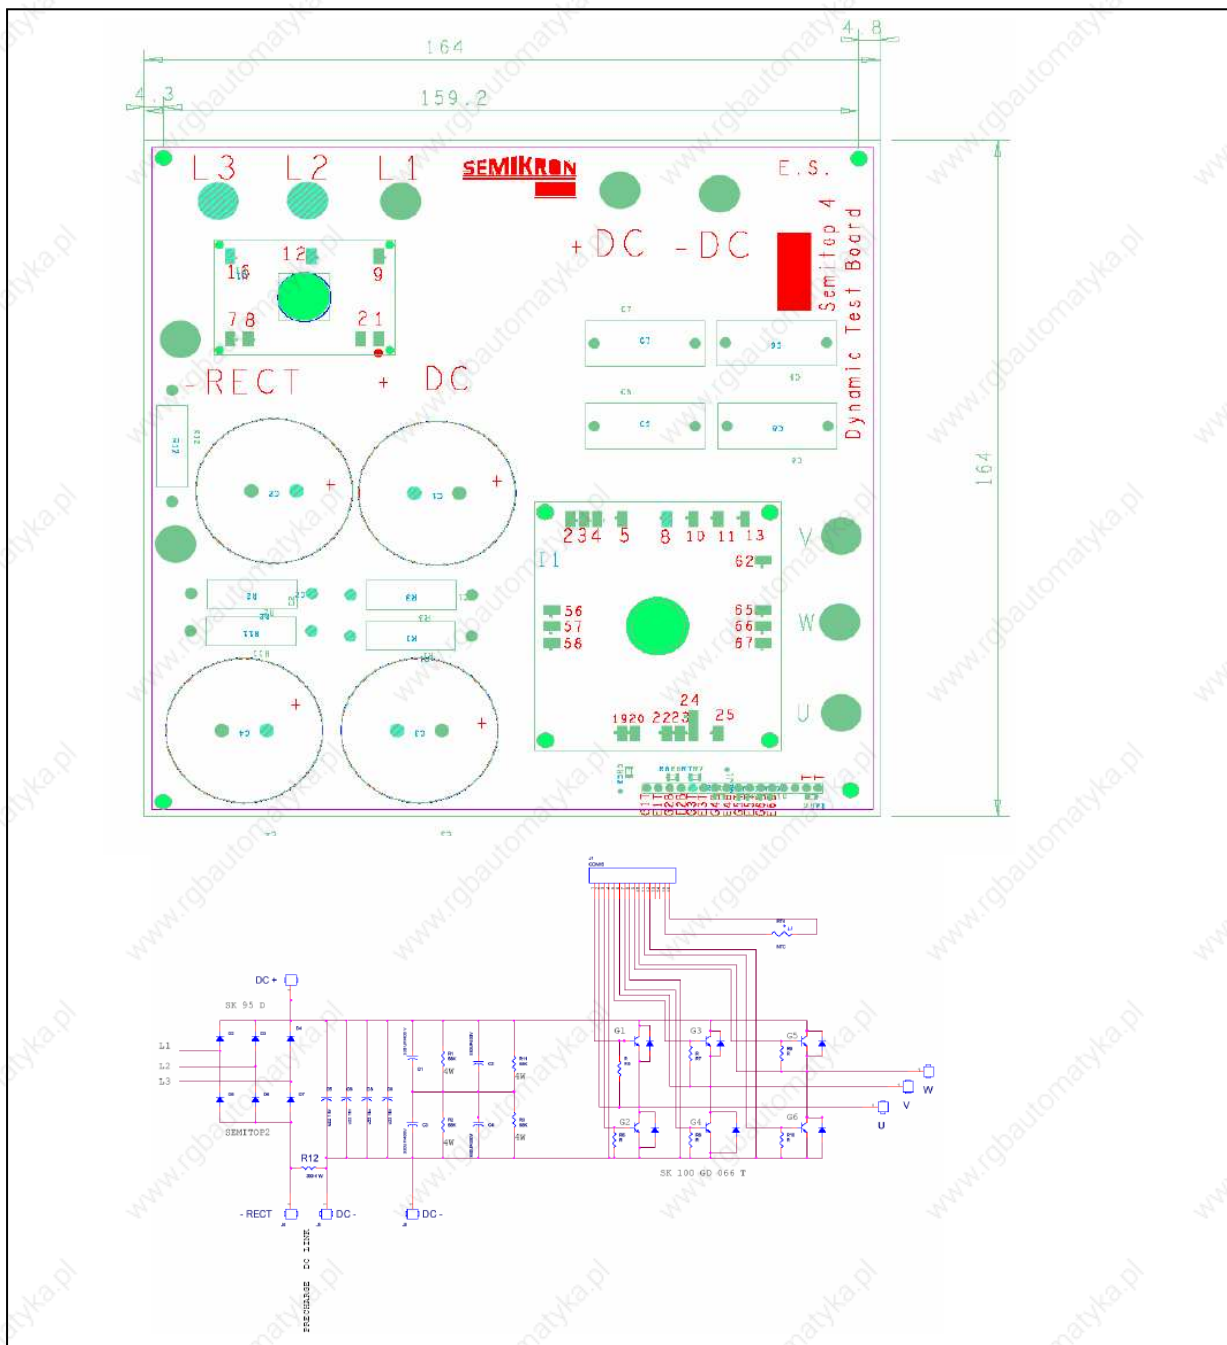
Demo PCB for GD topology: outer dimensions and schematic
